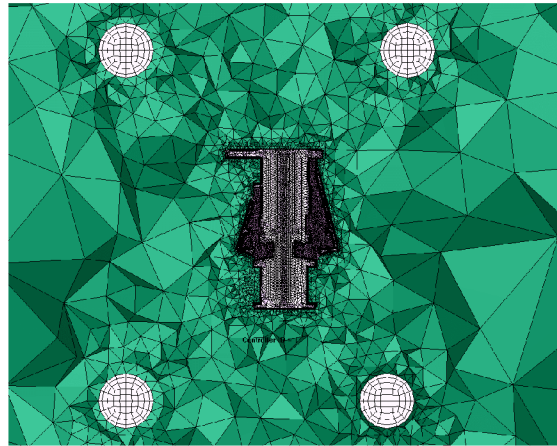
Mesh section showing meshes of part, mold inserts 531 and 532, cooling channels and mold steel
